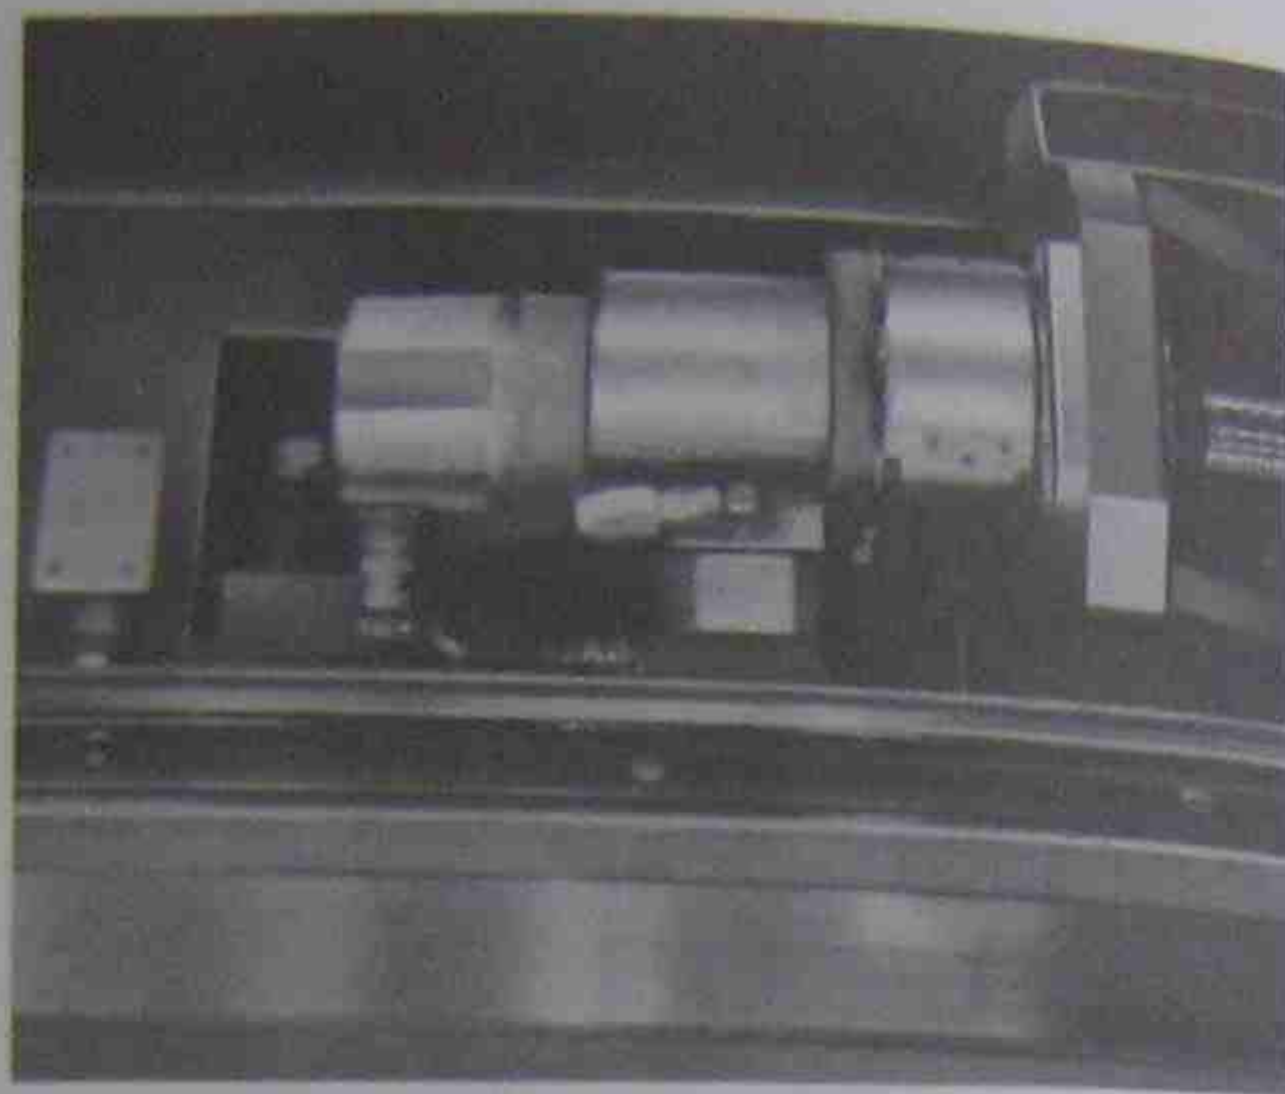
This hydraulic drive mechanism comprises a hydraulic motor, servo valve, and feedback package. The recirculating ball-nut lead screw to which the drive motor is attached is also shown.
